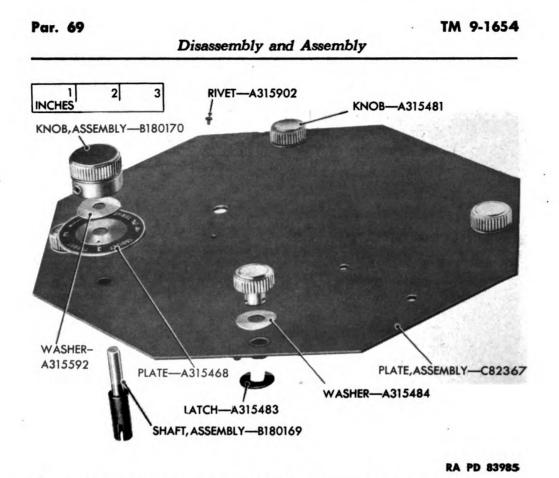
Target Housing Cover of Trainer M6 Showing Latch Knobs and Indicator Knobs Exploded
